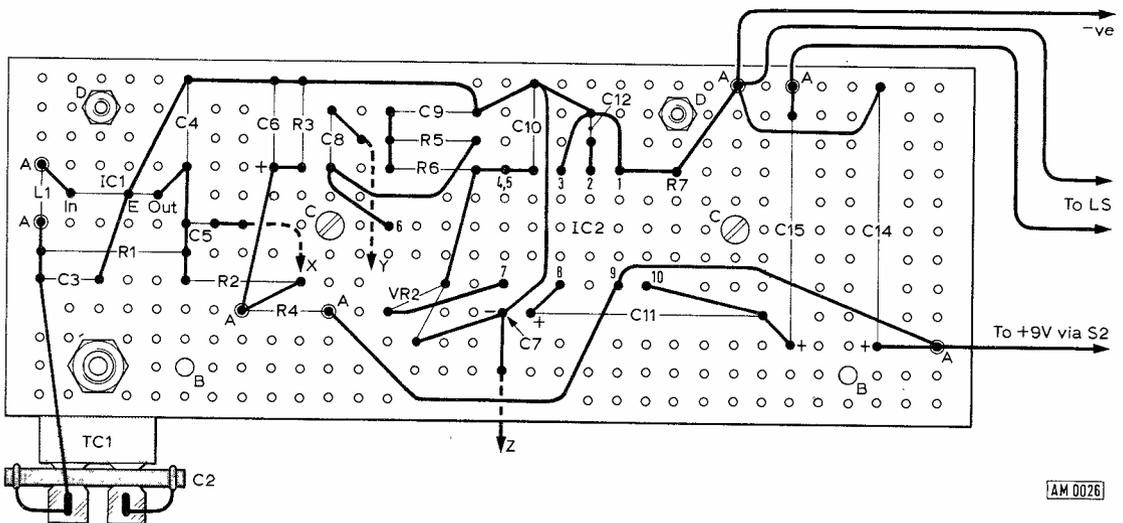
Underside wiring. Insulated sleeving should be used where necessary.
